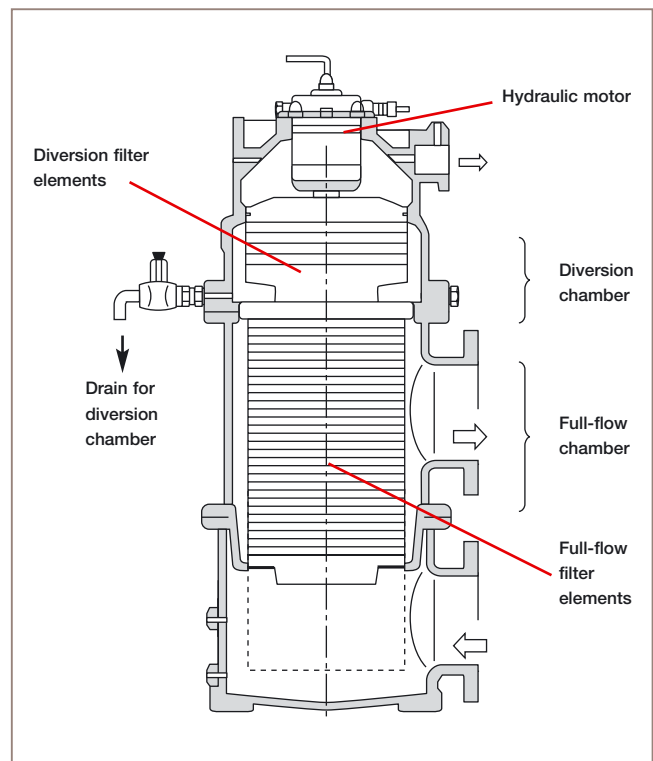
Fully assembled filter showing filtering unit and hydraulic motor.
